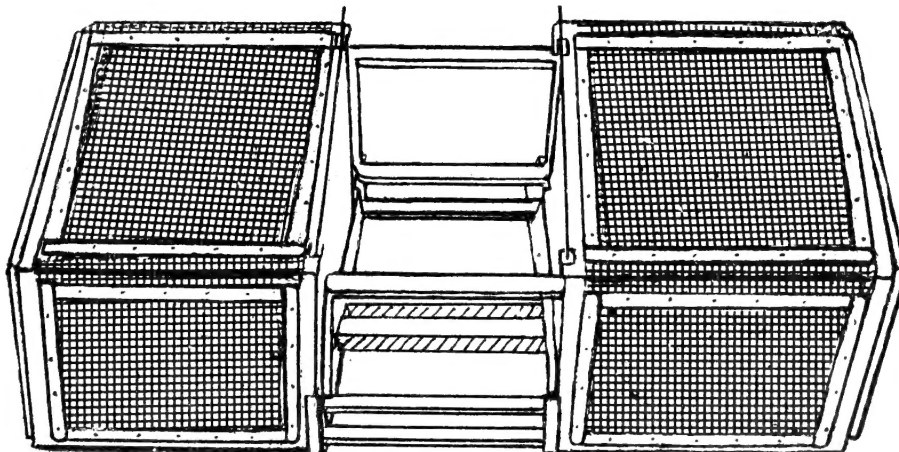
Metal frame with the two cages attached, showing complete assembly.
